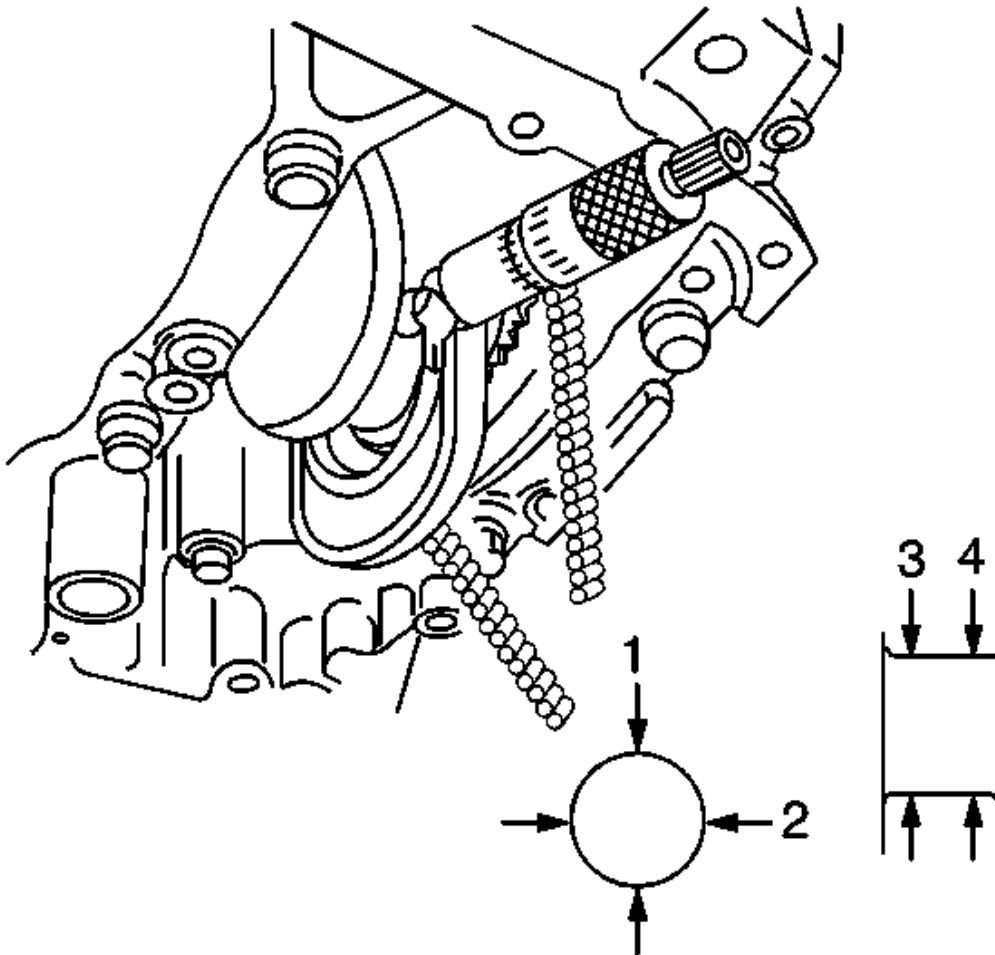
Measuring Connecting Rod Journal For Taper & Out-Of-Round
